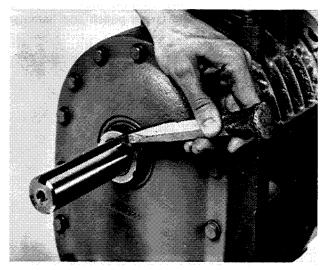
USING BLUNTED FLAT CHISEL AND BALL PEEN HAMMER TO LOOSEN LOCK NUT
